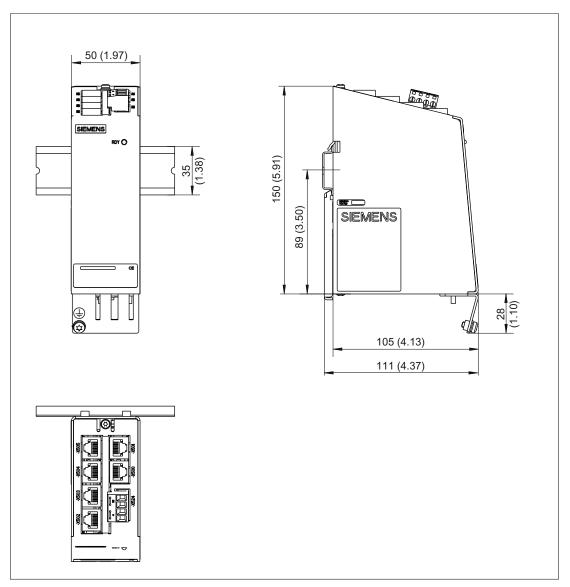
Dimension drawing of the DRIVE-CLiQ Hub Module DMC20, all data in mm and (inches)
